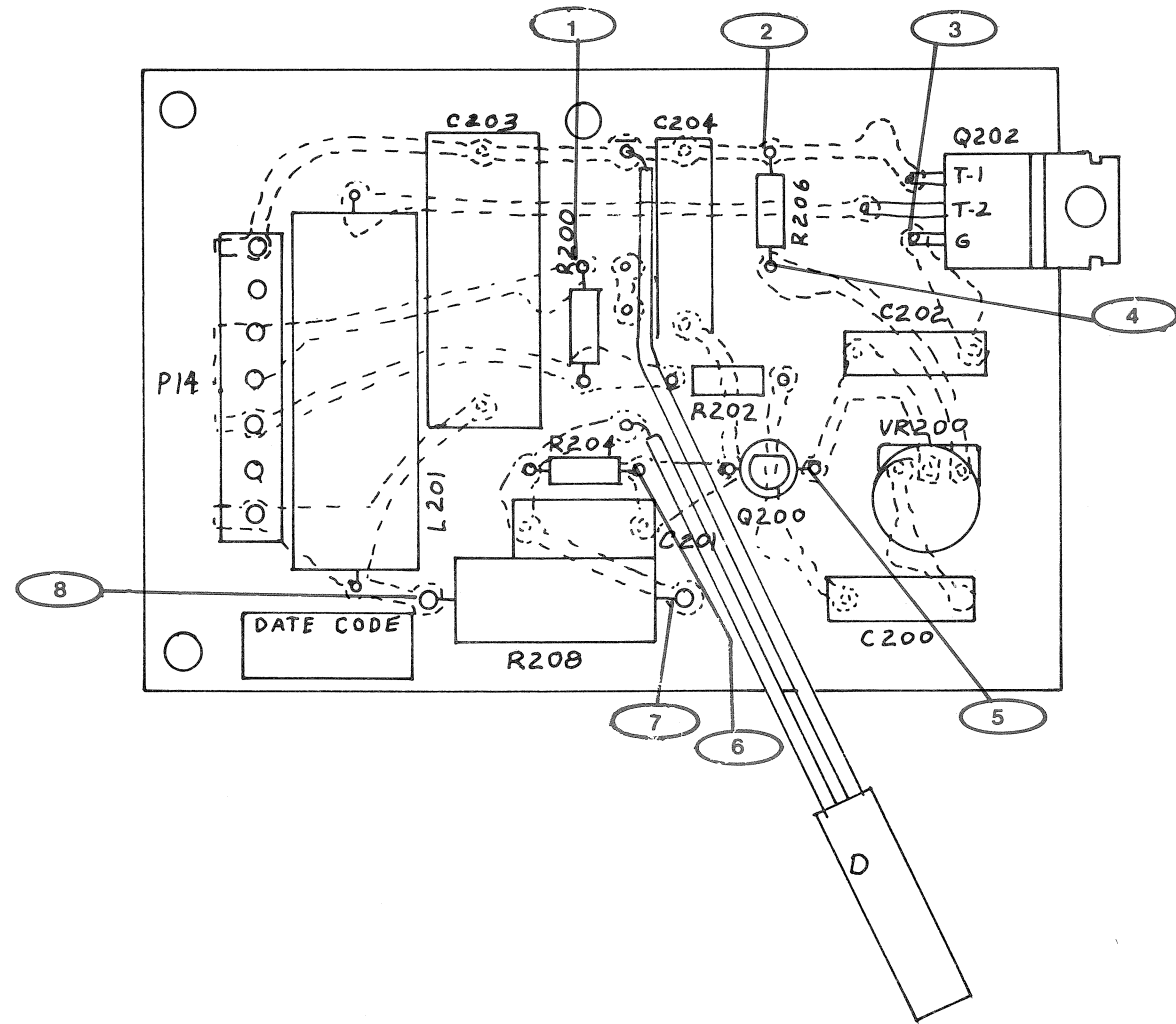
LAMP REGULATOR BOARD ASSEMBLY (Model 3230)
